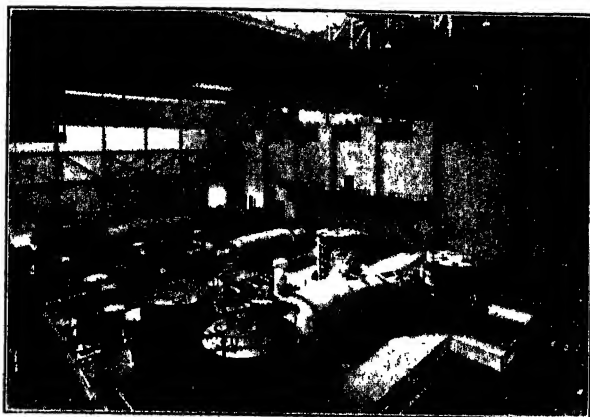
235,000-Kv-A. THREE-SHAFT GENERATOR
